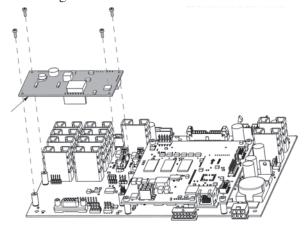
Screws Securing Flow Sensor PCB to Fluidics Controller PCB
